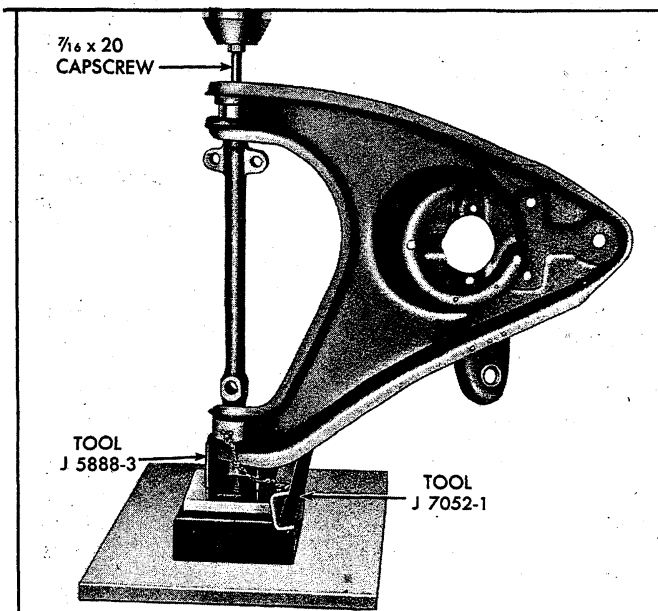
Removing Lower Control Arm Cross Shaft Bushing
